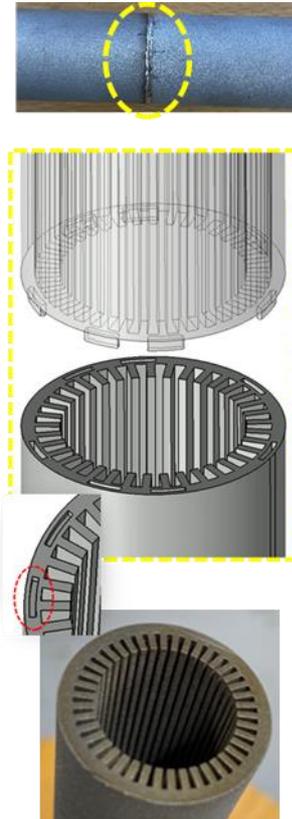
Joint surfaces of 3D printed heat pipes for connection
